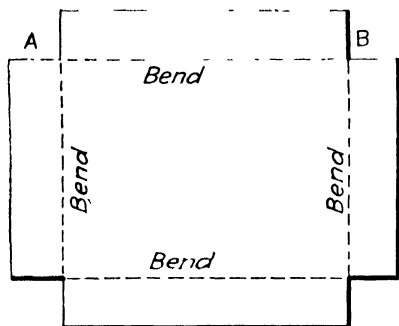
The chassis layout. Draw on the chassis metal the shape shown here. Cut out the corners, bend on the lines, and you have a chassis for your set.
